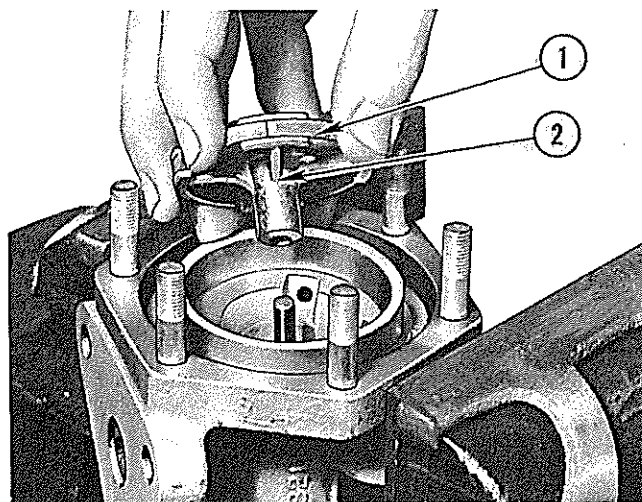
REMOVING DIAPHRAGM GUIDE
